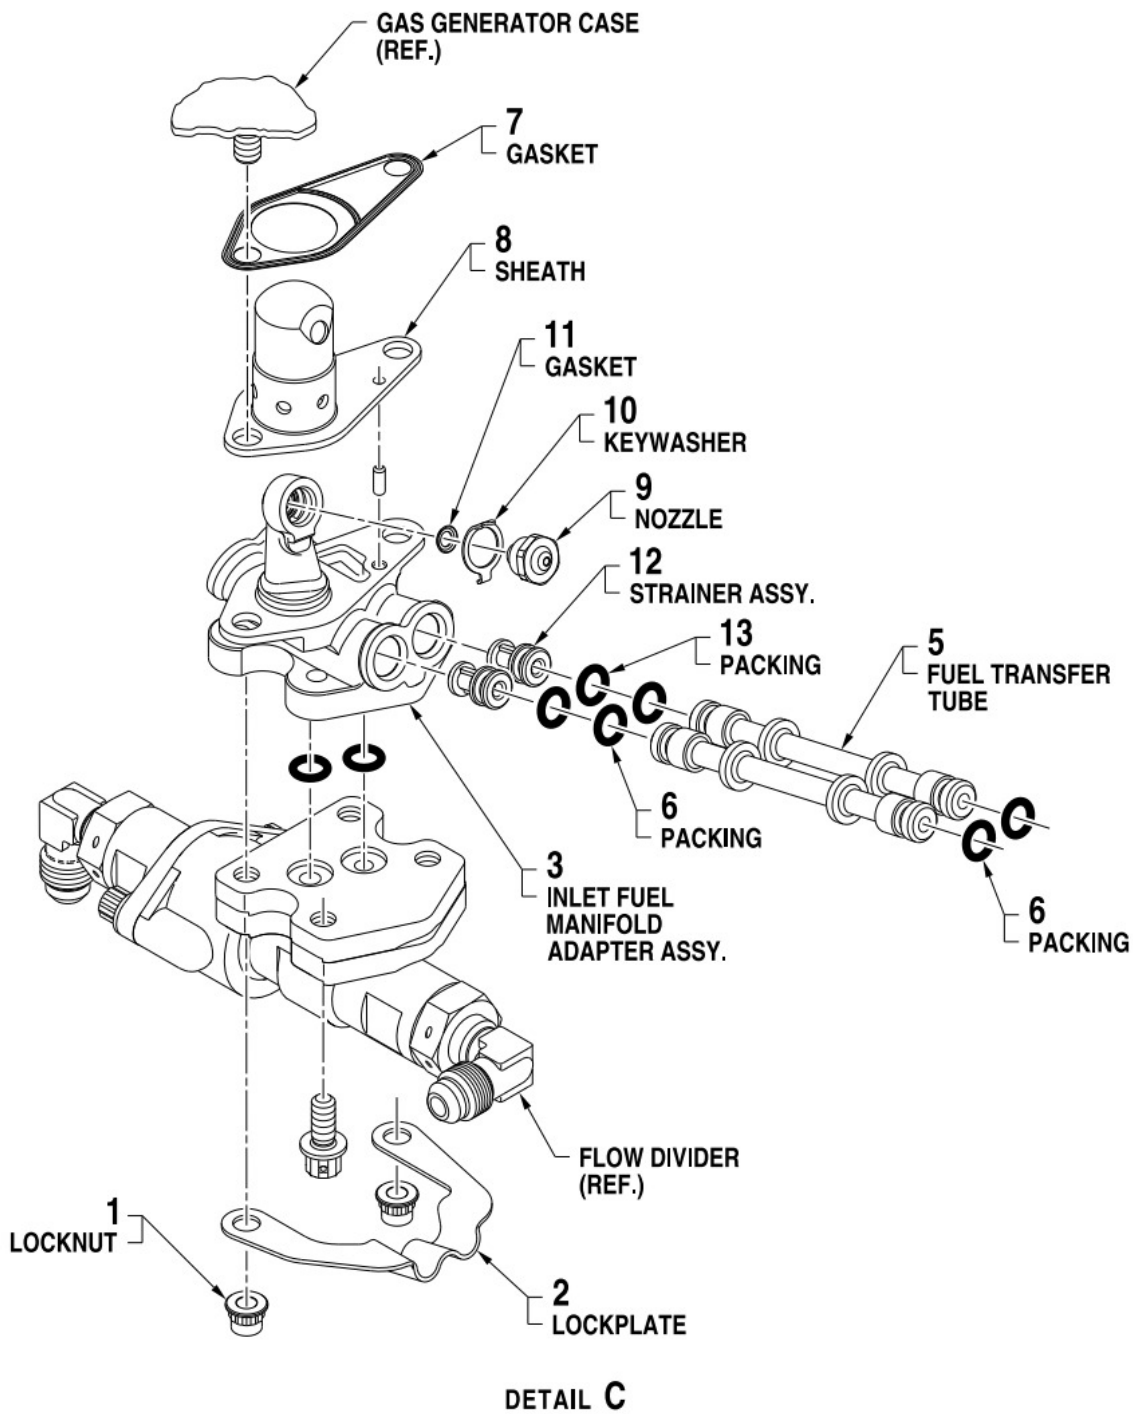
Removal of the Fuel Manifold Adapters and Transfer Tubes (Task 73-10-04-000-801)
